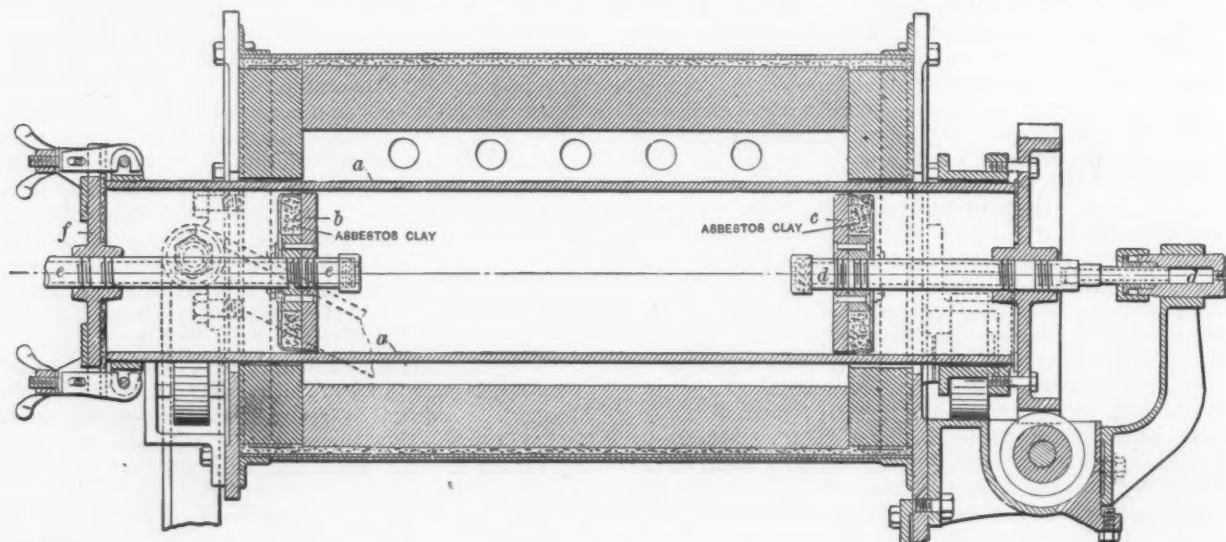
Longitudinal Sectional Elevation of the Furnace and Retort of the Carbonizer.
